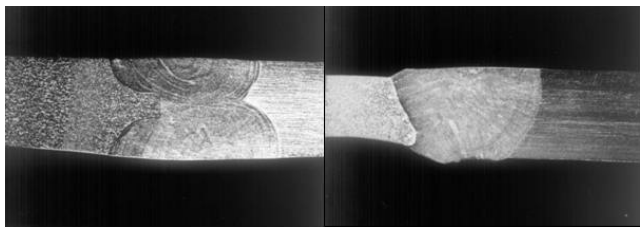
Macrostructure of double-sided welded butt joint of 3.0 [mm] thick of 0H18N9 austenitic steel and S235JR carbon steel sheets and single-sided butt joint of 3.0 [mm] 0H18N9 austenitic steel to 2.0 [mm] thick S235JR carbon steel sheets, HPDL laser welded (laser beam power: 2.3 [kW], welding speed: 0.2 [m/min], laser beam spot width: 1.8 [mm]), magnification: 10x
